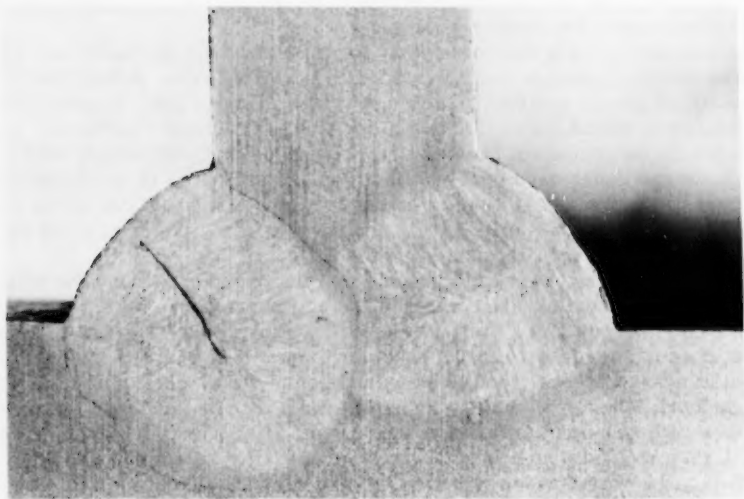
Cracking of this type is associated with submerged arc welding and is the result of attempting to obtain excessive penetration which has resulted in this "familiar" pear shaped weld.
